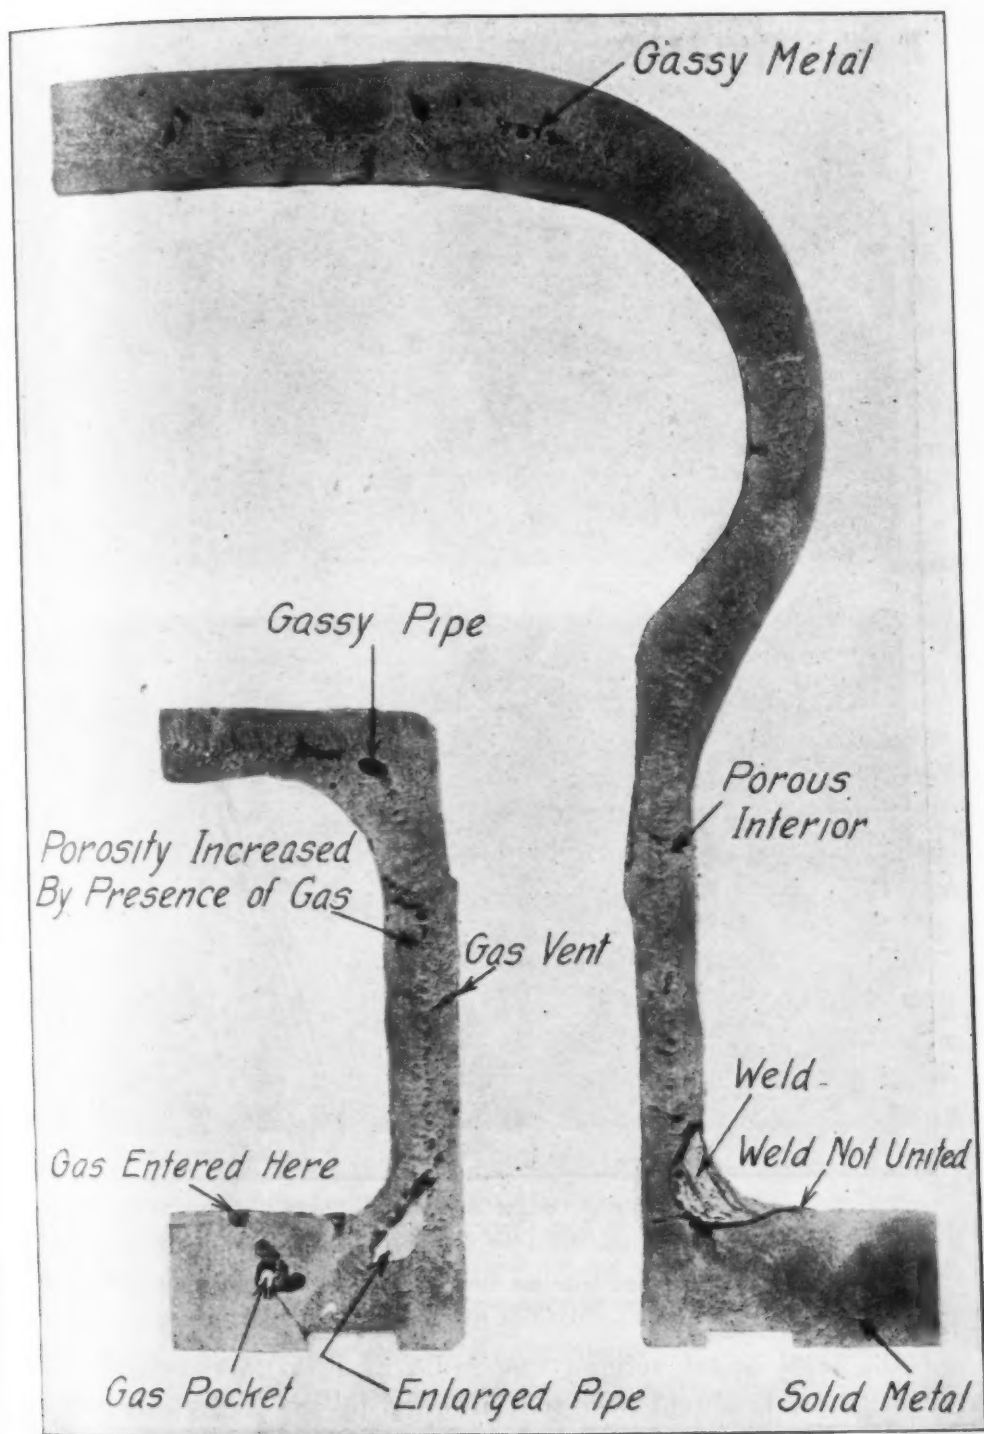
Section of a Commercial Steel Casting Showing Numerous Types of Defects which may occur in such Steel Castings.
